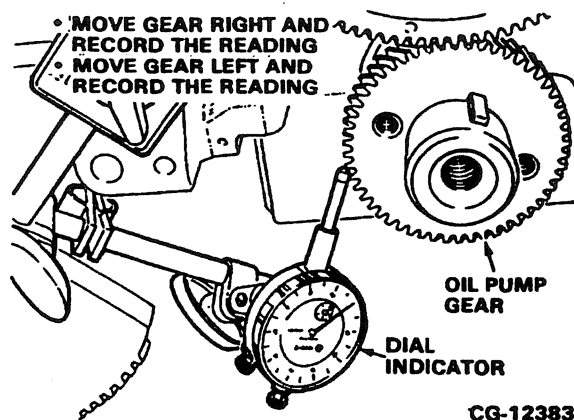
Check Oil Pump Drive Gear to Crankshaft Gear Backlash
